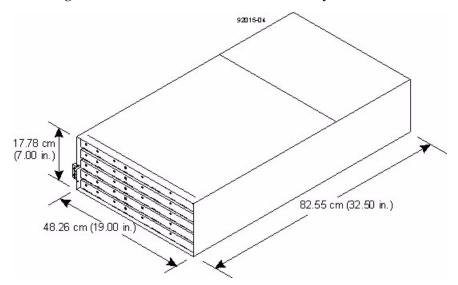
Dimensions of the DE6600 Drive Tray - Front View
